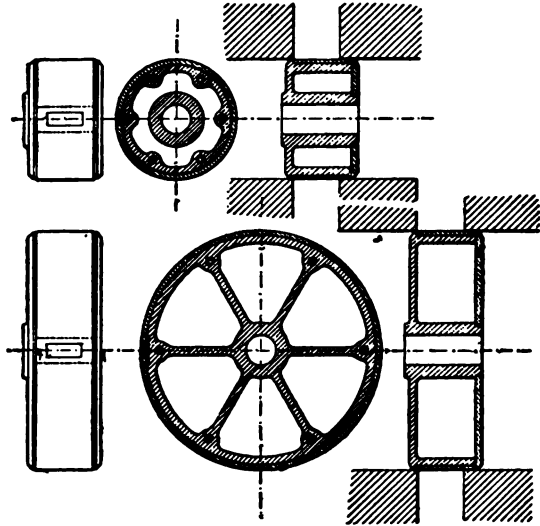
Rail-mill Engines: Piston-valves. Scale $1/16$ th.
